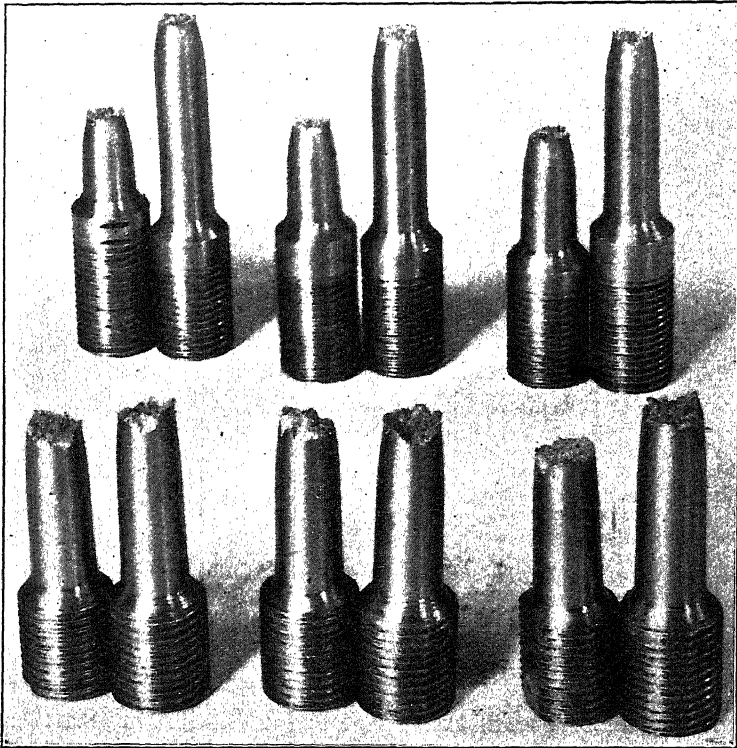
FRACTURES OF SPECIMENS AFTER SECOND HEAT TREATMENT SUBMITTED TO STATIC TENSILE TEST.
